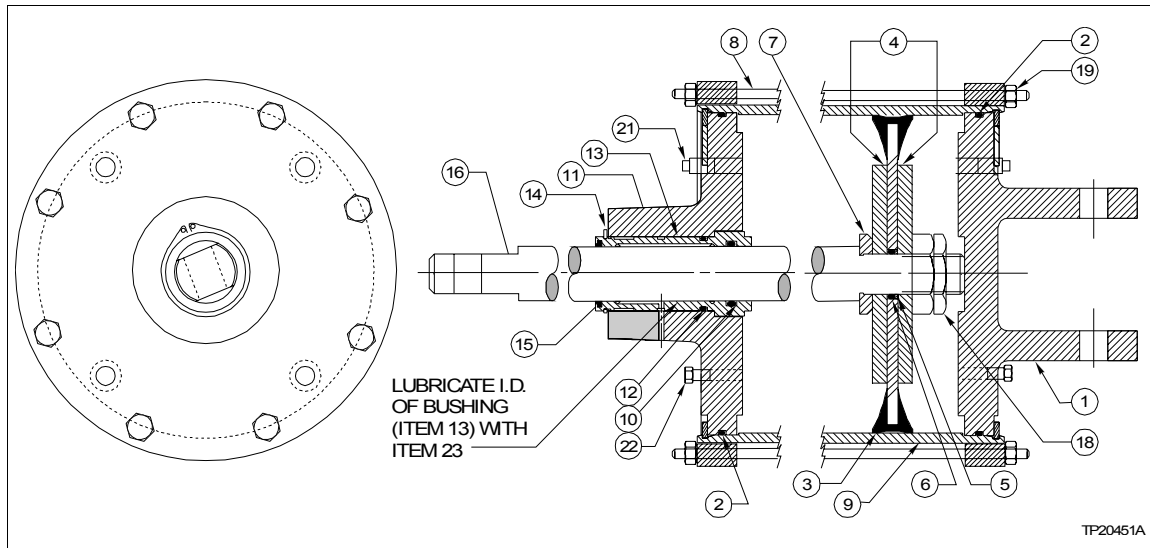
Cylinder Assembly for Type UP3 Actuators (Part Number 5328775°1)
